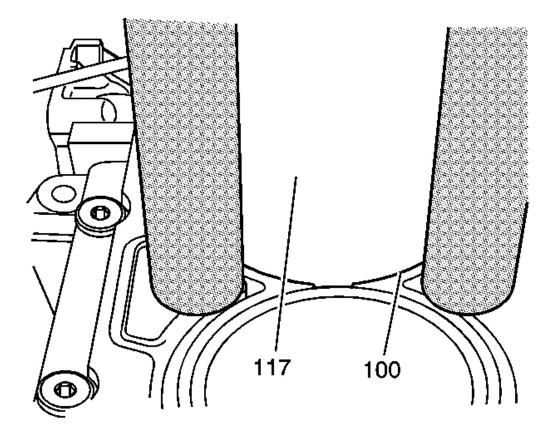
View Of Proper Liner Alignment Courtesy of GENERAL MOTORS CORP.
